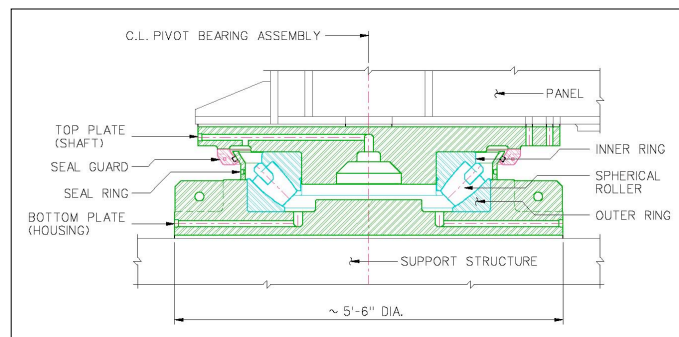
Replacement pivot bearing assembly with spherical roller thrust bearing.
